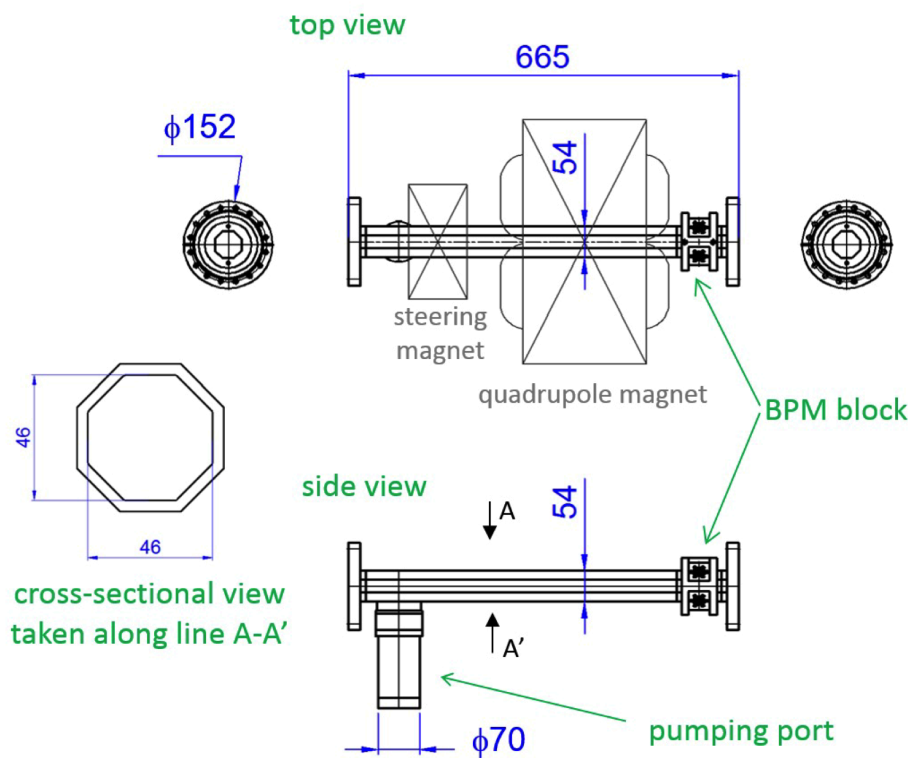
Octagonal beam pipe for the straight sections. The distance between the two faces of the cross-section is 46 mm in this case. The beam pipes in the straight sections are simpler than those in the arc sections.
